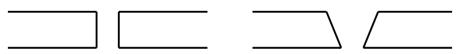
An illustration of weld cross sections for different joint designs: squared butt joint (left) and a grooved joint (right).
